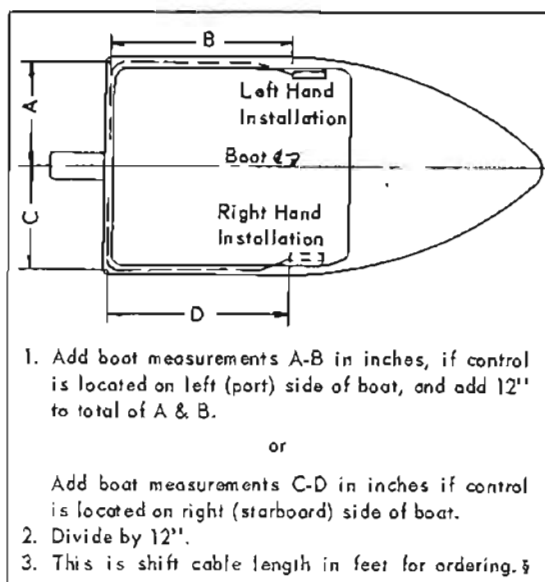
MerCruiser II Stern Drive Unit Shift Cable
